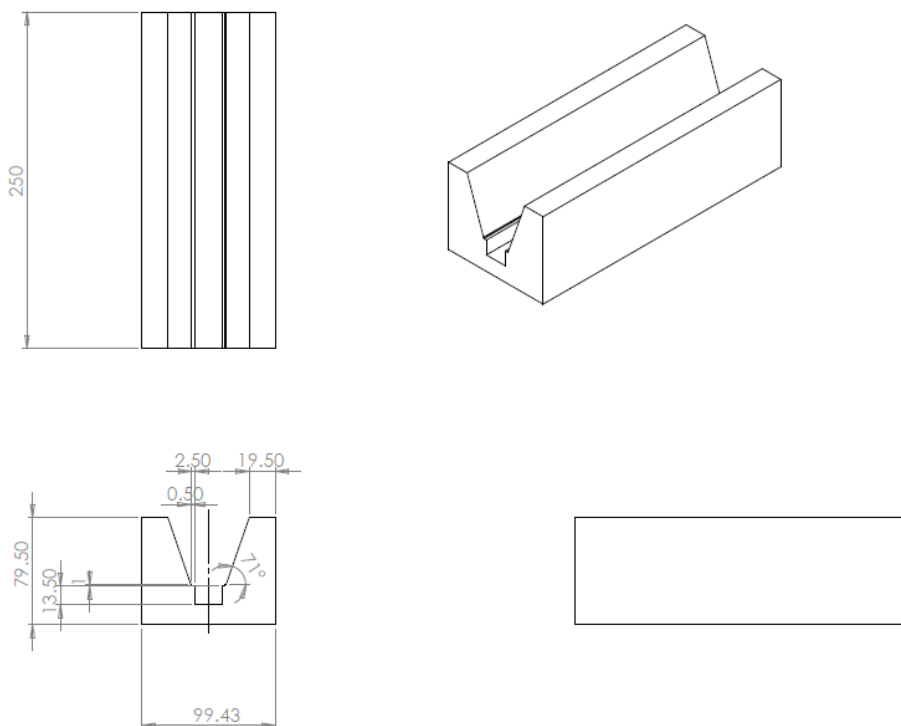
V-trough Technical Drawing Schematic (dimensions in mm)
